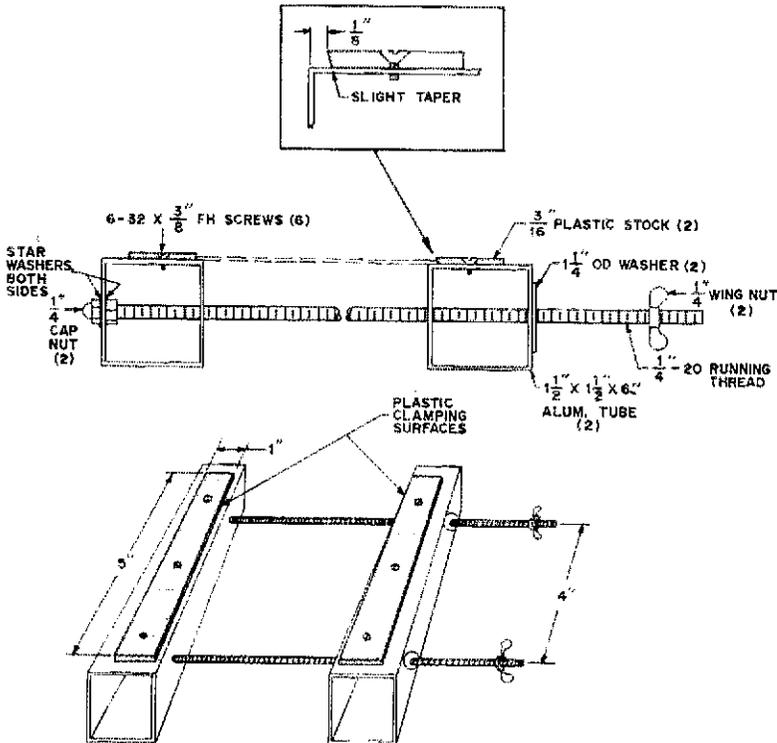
Printed-circuit-board rig. Wooden blocks can be used instead of aluminum tubing.
